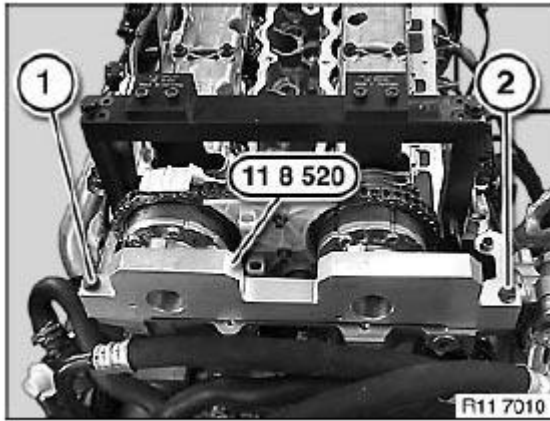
Identifying Special Tool 11 8 520 And Bolts
